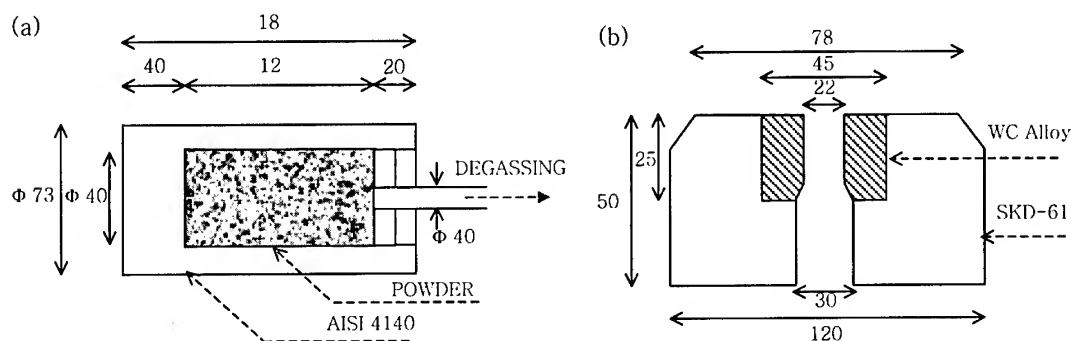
Schematic drawings of (a) can and (b) die used for extruding elemental Ti-46.6Al-1.4Mn-2Mo alloys. Unit of the dimensions: mm.
